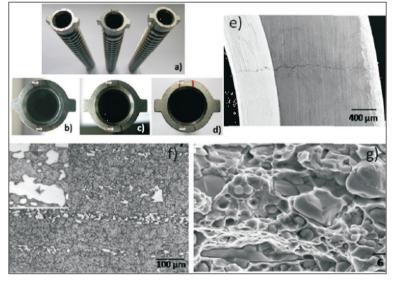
Failure of AISI-440C ball screws (a) global picture with red markings on ball screws showing the location of failure, (b-d) close up view of the cracks on opposite sides shown with white arrows (e) higher magnification photograph of the crack noticed, (f) aligned chromium carbide particles along the working direction with an inset showing the microhardness indents on carbides and matrix and (g) fracture surface of the failed ball screw showing coarse oriented carbides [2].
